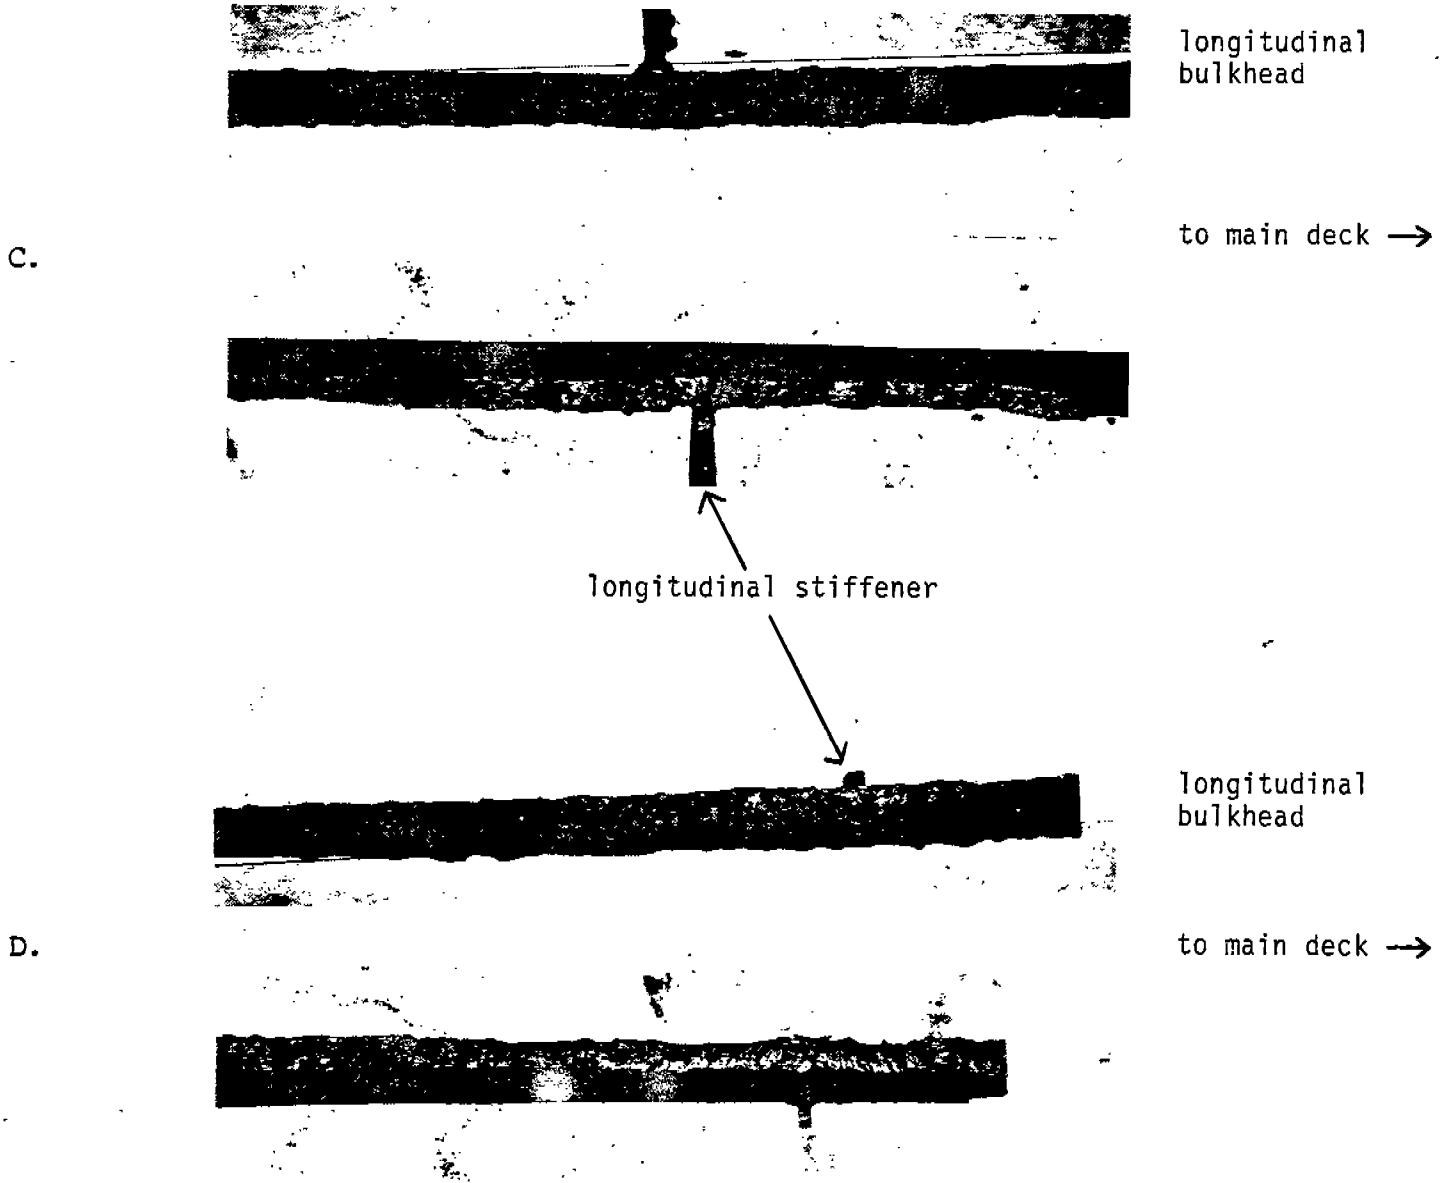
(Cont'd) Details of the 123,000 DWT Tanker Fracture Surface
